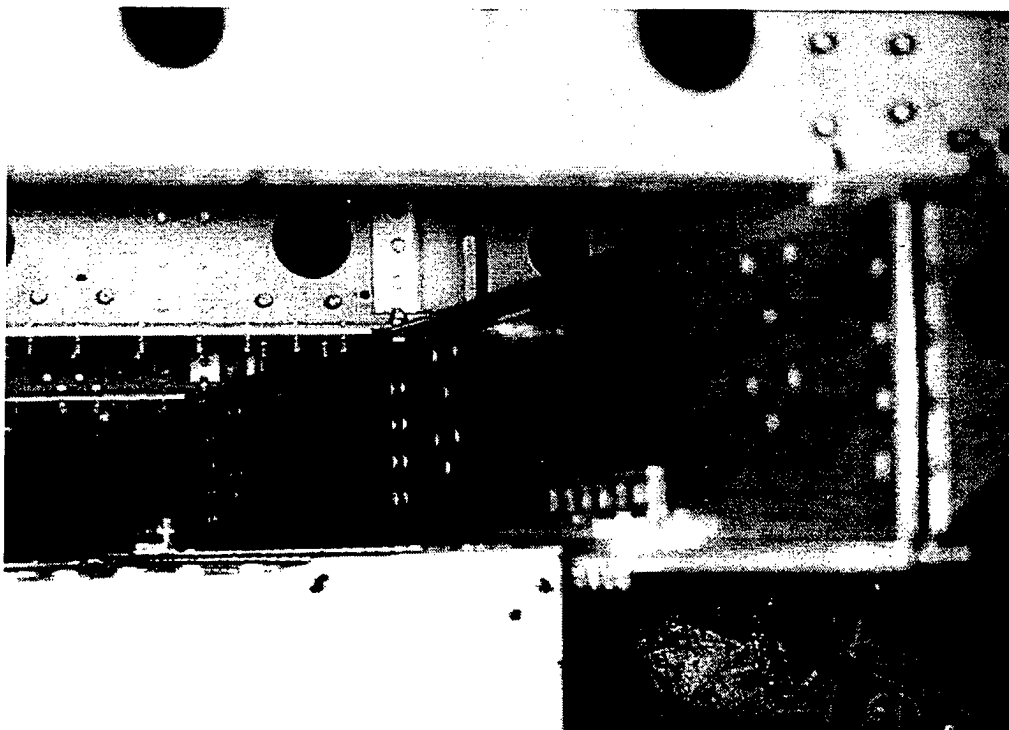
PRETEST AUXILIARY FUEL TANK LEFT ATTACHMENT FRAMEWORK
